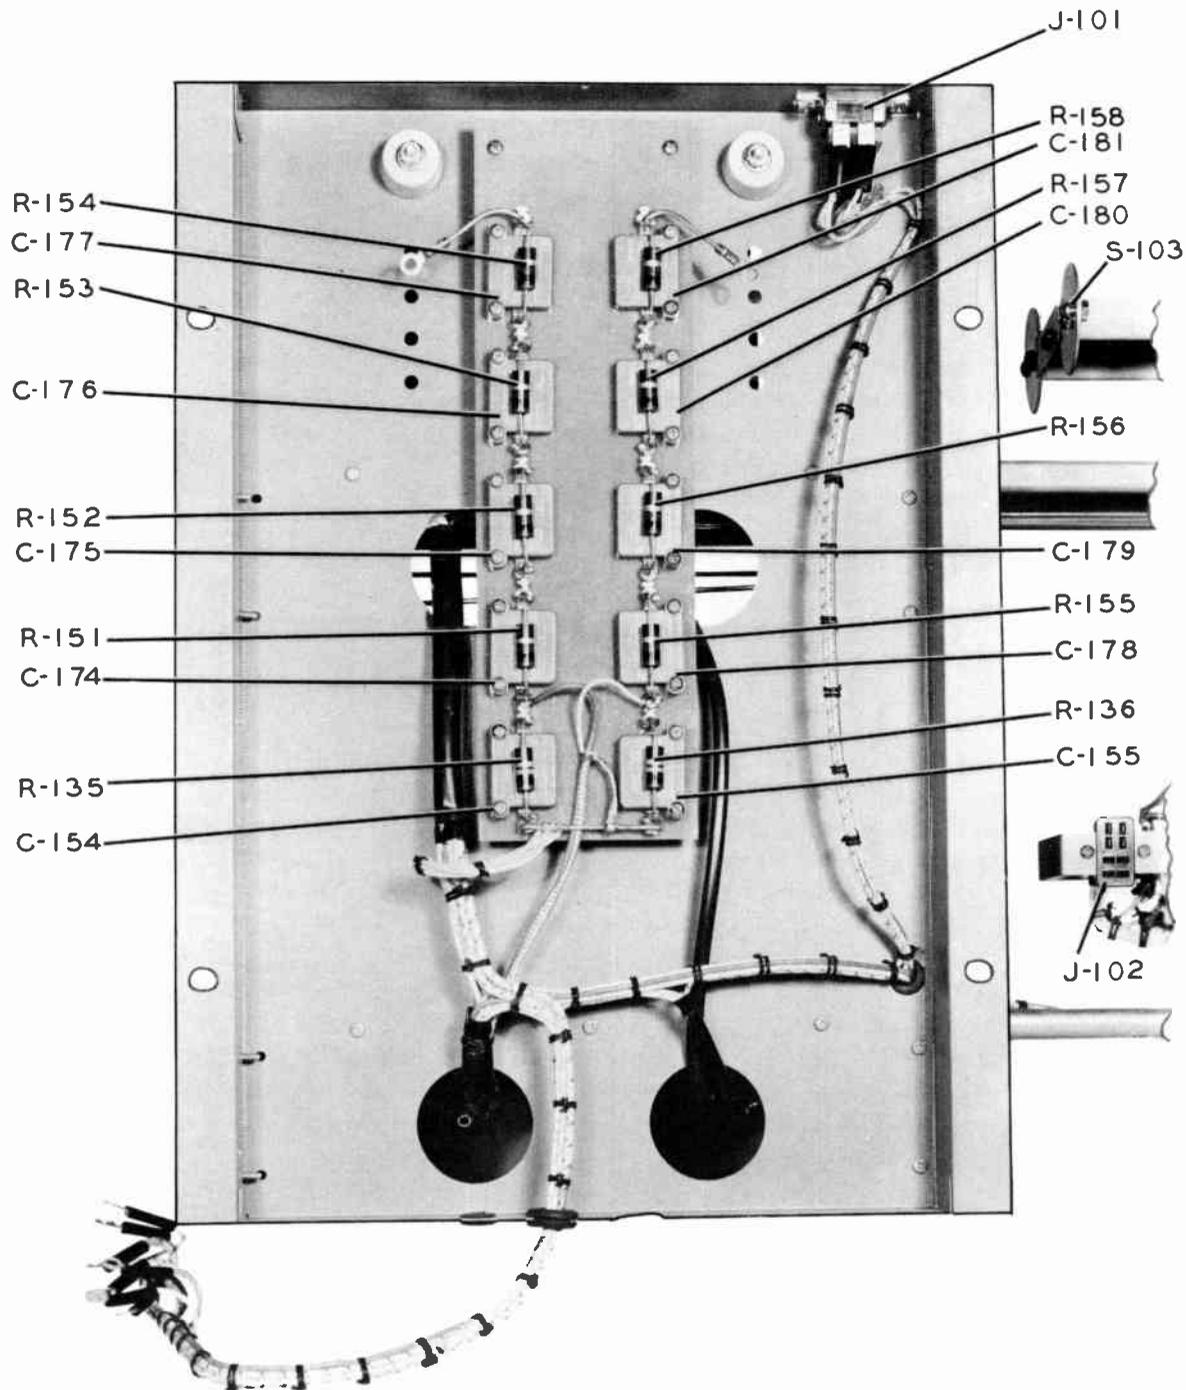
Driver Cabinet Audio Chassis, Side View.
